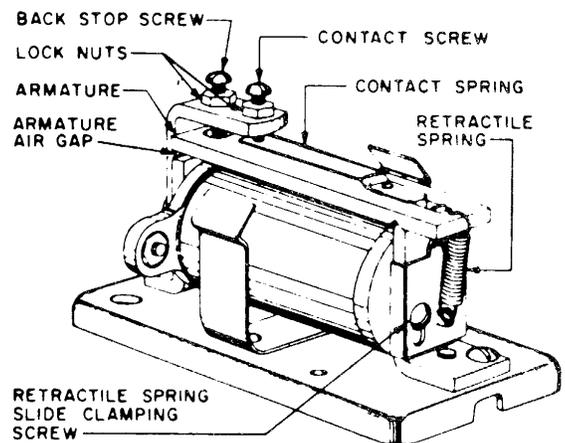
4-Type Buzzer (4C buzzer, with cover removed, illustrated)
